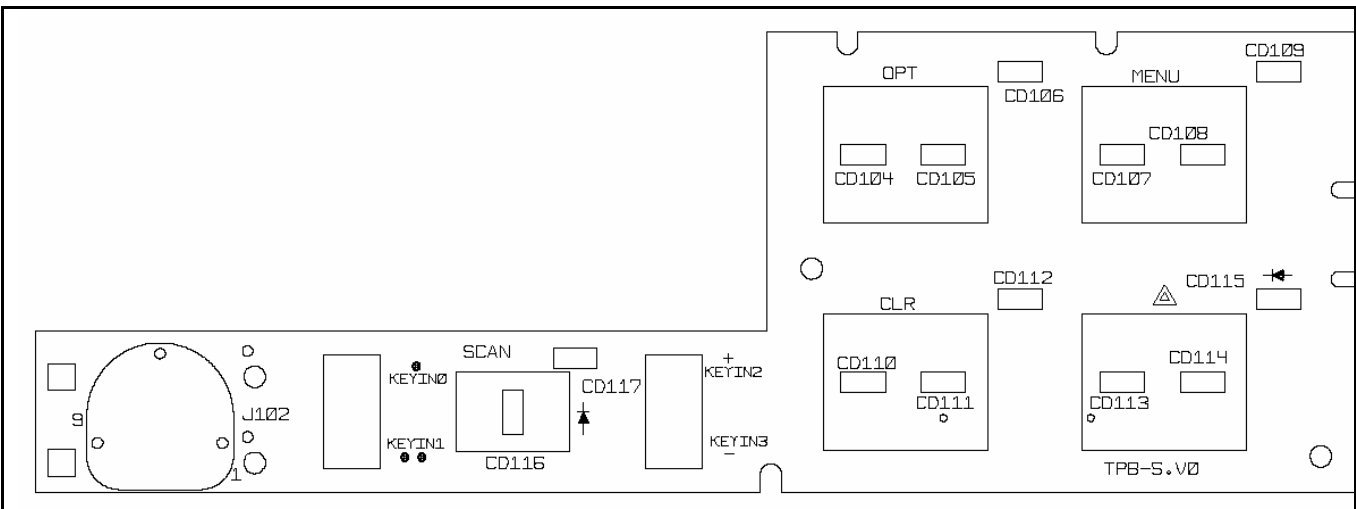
Switch Circuit CDF-368BC Solder Side
